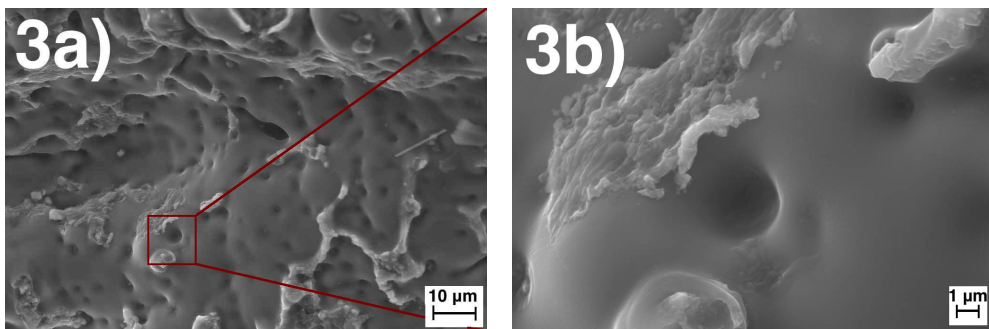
Pores and oxidation on the fractured surface of AA6082.50-T6 welded and shot peened.
